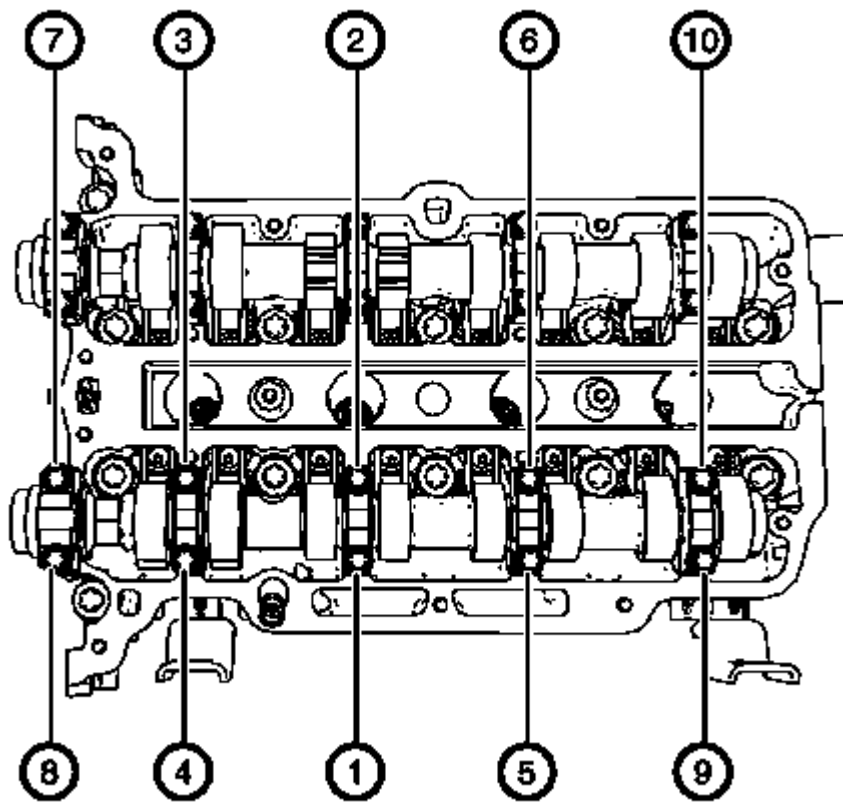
Exhaust Camshaft Bearing Cap Bolts Tightening Sequence
